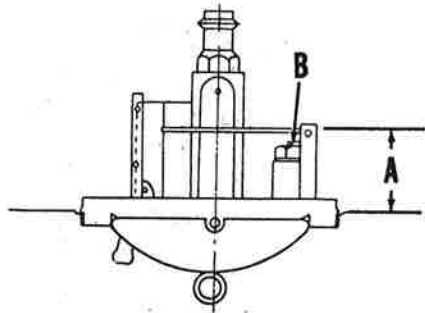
Float level (A) is adjusted by bending tang (B) on float arm. Float level should be correct when float arm is parallel with gasket surface of throttle body.
